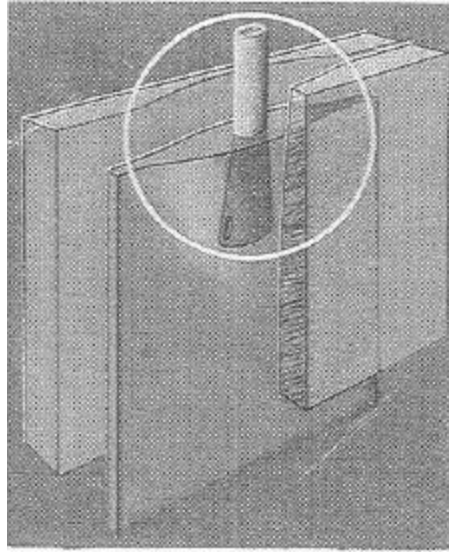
Schematic diagram of a funnel-shaped mold in the TSC-CSP process machine
